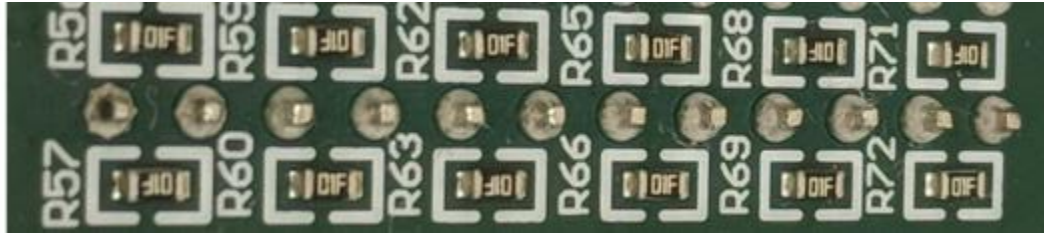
Selective soldering training board showing close proximity of surface mount components to through hole soldering areas.
